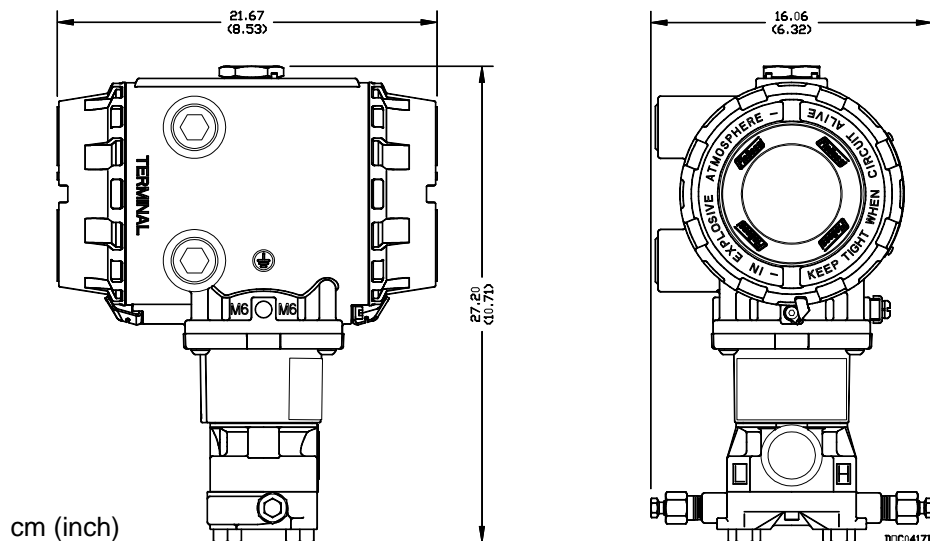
Outline and Mounting Dimensions without Solar Panel
